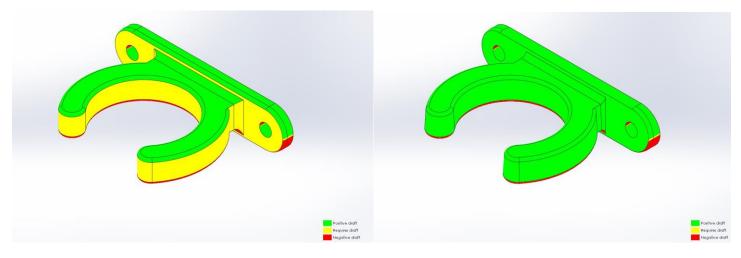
Before and after images from clamping mechanism using Solidworks "Draft Analysis"
